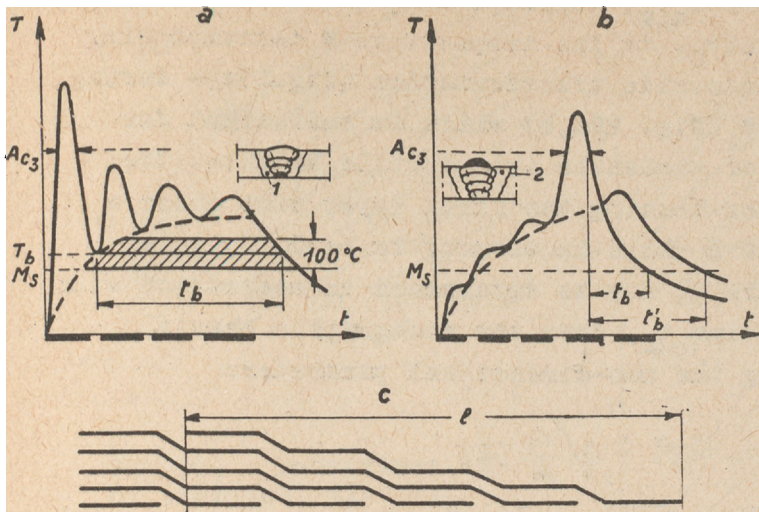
Thermal cycle in the heat affected zone in multi-layer welding by short sections; a - first layer (point 1); b - last layer (point 2); c - scheme of cascade welding.
